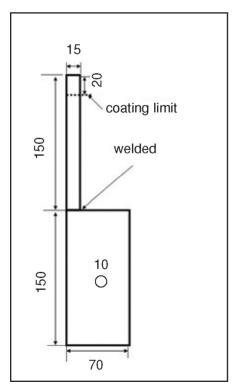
Specimen design for the cathodic disbonding tests; dimensions in mm Courtesy of the authors
